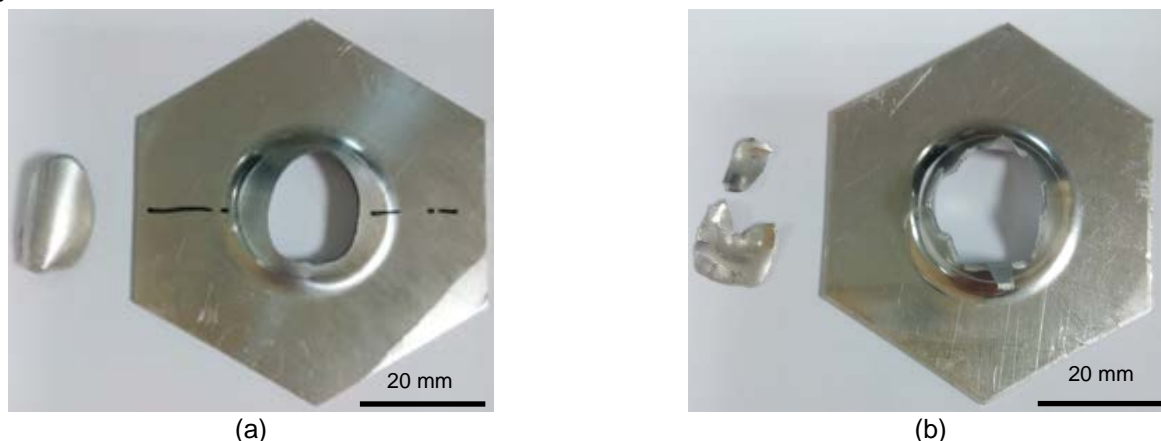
Disk pressure test (DPT) specimens after testing, a) Welded, b) Base Metal
